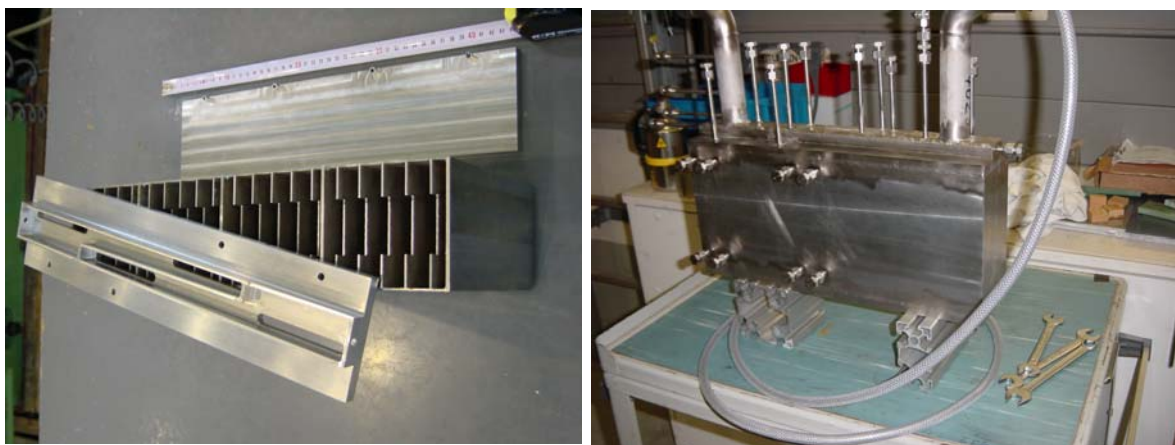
HCLL test section before welding and finally prepared for pressure test.
